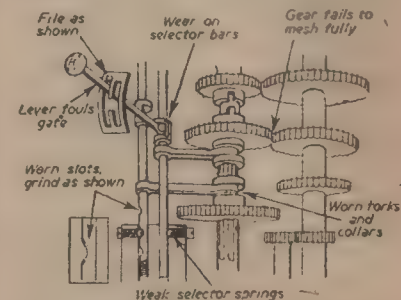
Selector troubles which contribute to jumping out of gear. Remedies indicated are dealt with in the text. Although for simplicity's sake an old-type box is shown, the points apply equally to a modern assembly.
